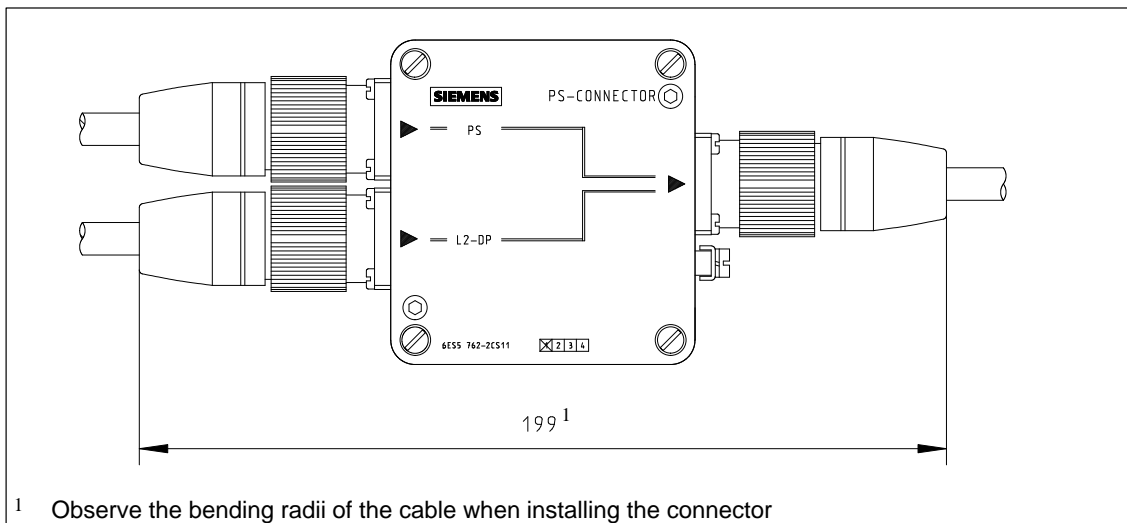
Power Supply Connector: Dimension Drawing with Plug Connectors (with Pin/Socket Insert)
